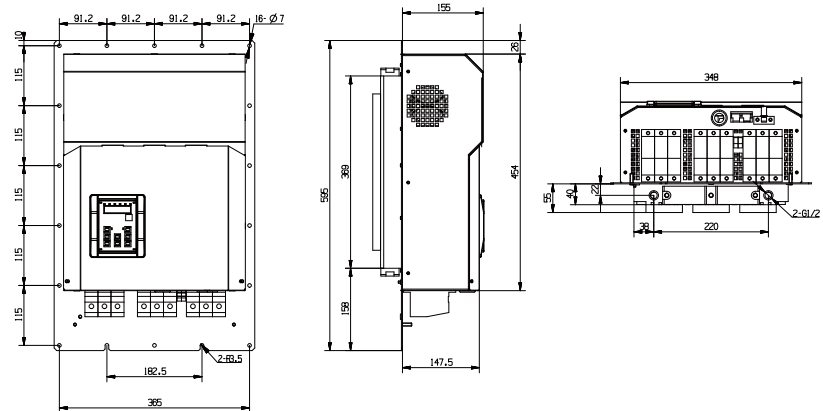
37-45-55-75-90kW Liquid-cooled drives (Shell's serial code: R)
